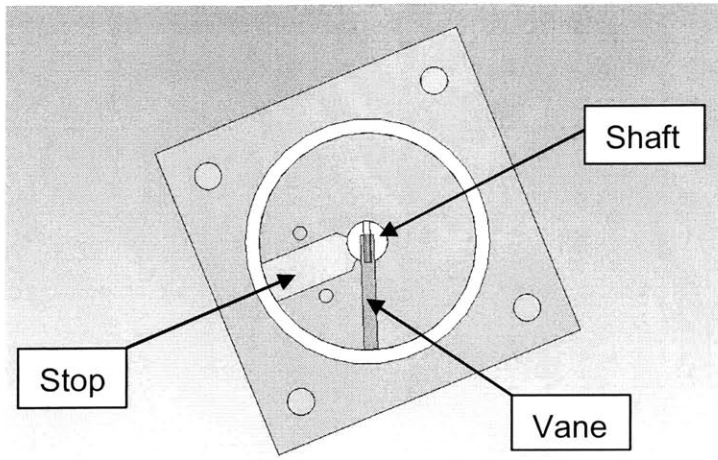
Section view of the initial prototype for the hydraulic vane motor
